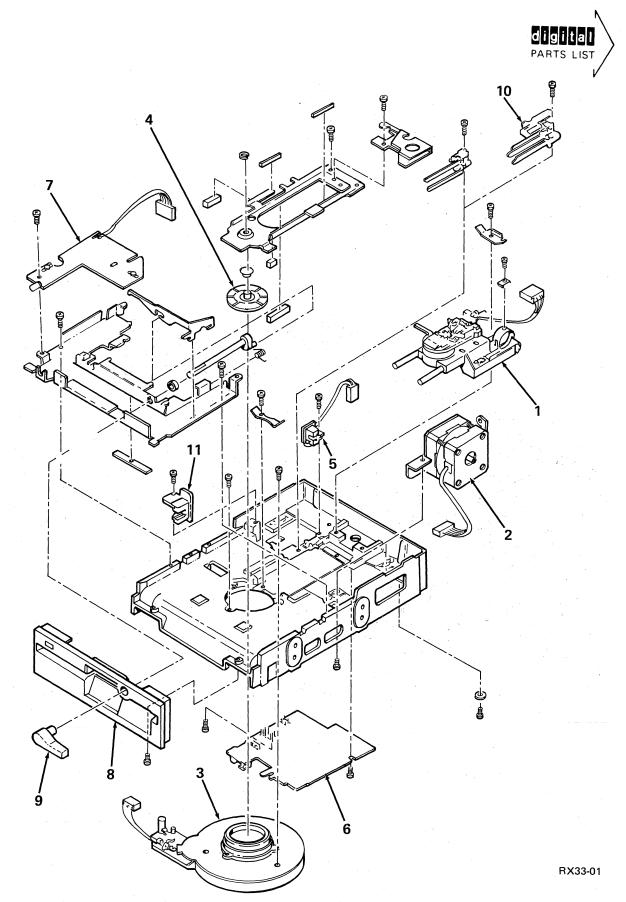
RX33 Flexible Disk Drive Assembly (Sheet 2 of 2)
